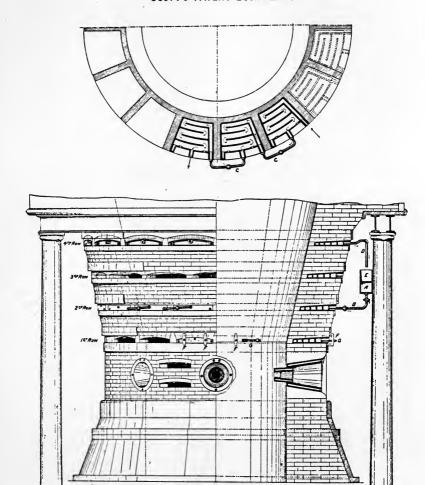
Showing Arrangement of Cooling Plates and Tuyeres. (Best Manufacturing Co.)
